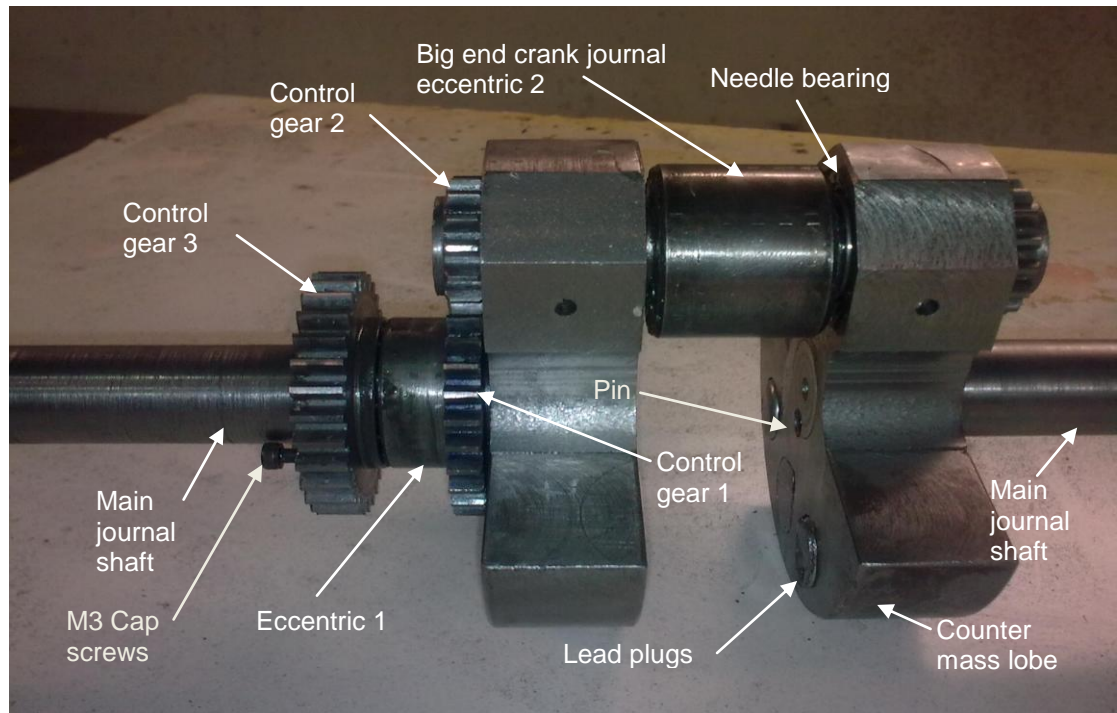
Prototype crankshaft (eccentric 1, control gear 1 and 3 are omitted on the right side of the crankshaft)
